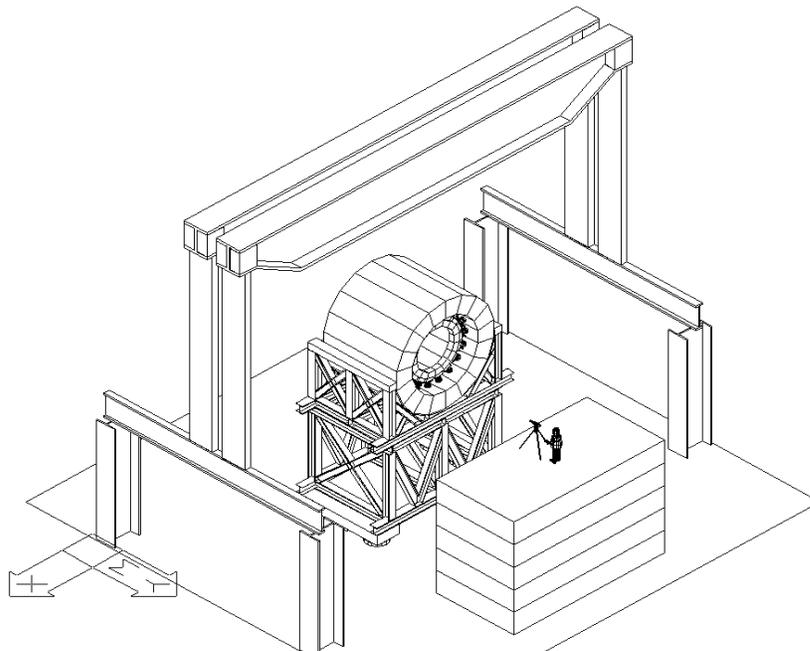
CMS HCAL barrel assembly / installation step 9.
